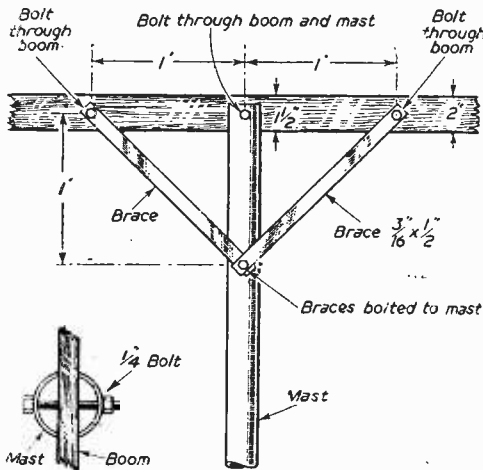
Details of the fixing of the cross-boom to the mast.
